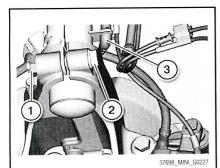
Disengage pulse generator (3) from spring strut. Release nut (1) and remove screw (2)
